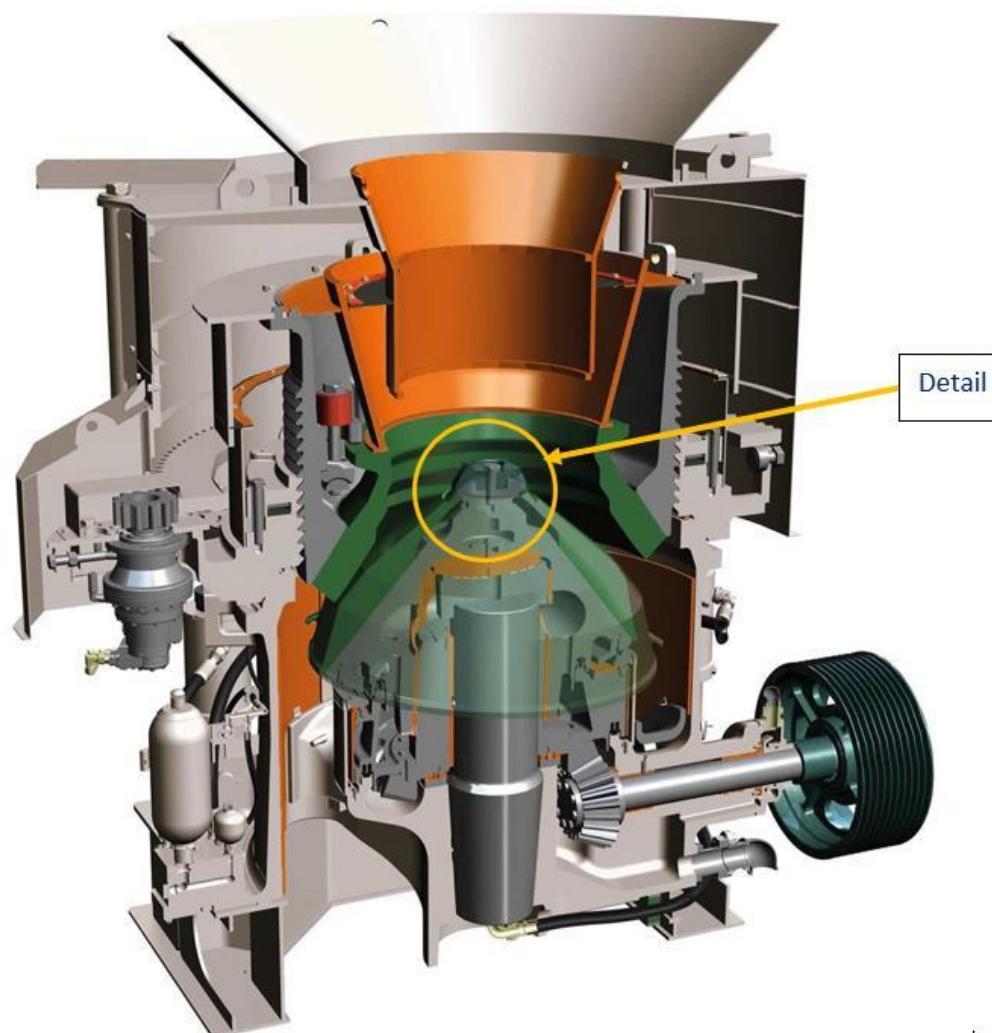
Placement of the studied part in a cone crusher in section view [69].
